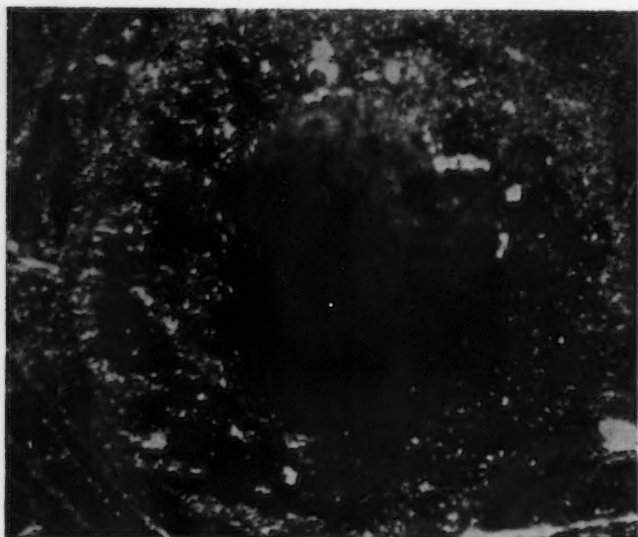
Is "pin hole" porosity in castings caused by mold gases entering the skin through surface inclusions which remain liquid after the envelope is solid? At 50 diameters this porous cavity is seen to have a ring of slag at the neck.
